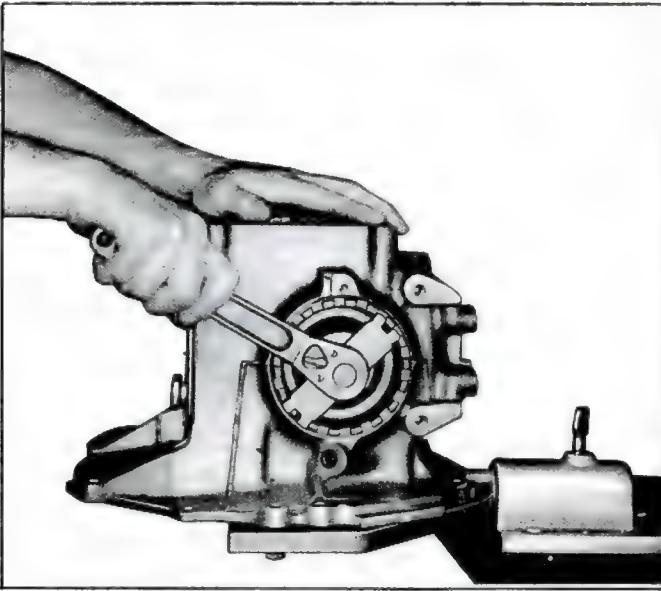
Tightening Side Bearing Adjusting Sleeve with J-8342
